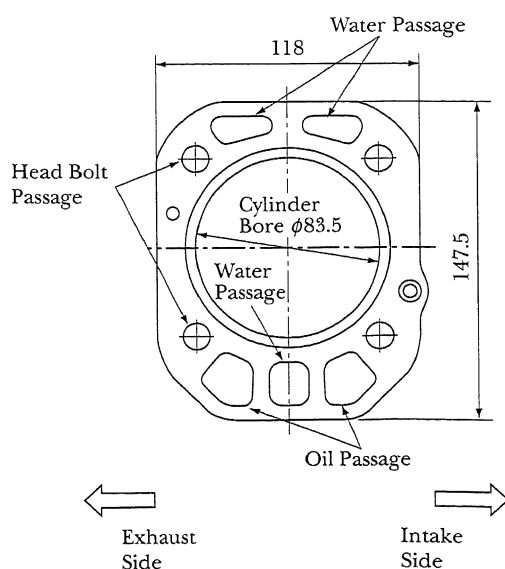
(a) Shape and Dimensions of the Test Cylinder Head Gasket (Soft Facing Gasket Perforated Core)
